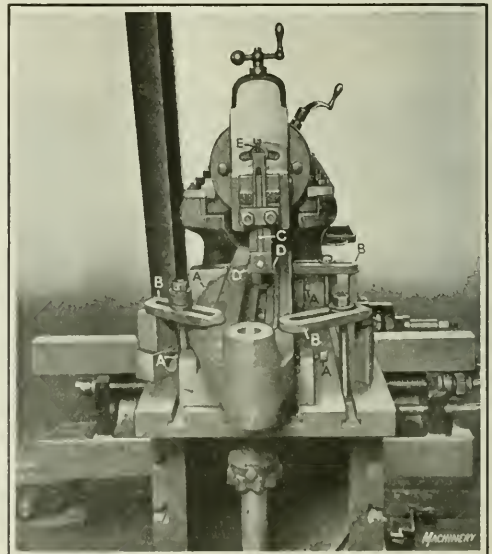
Crank Shaper equipped for simultaneously planing Sides of Slot in Rocker Arm for a Shaper
